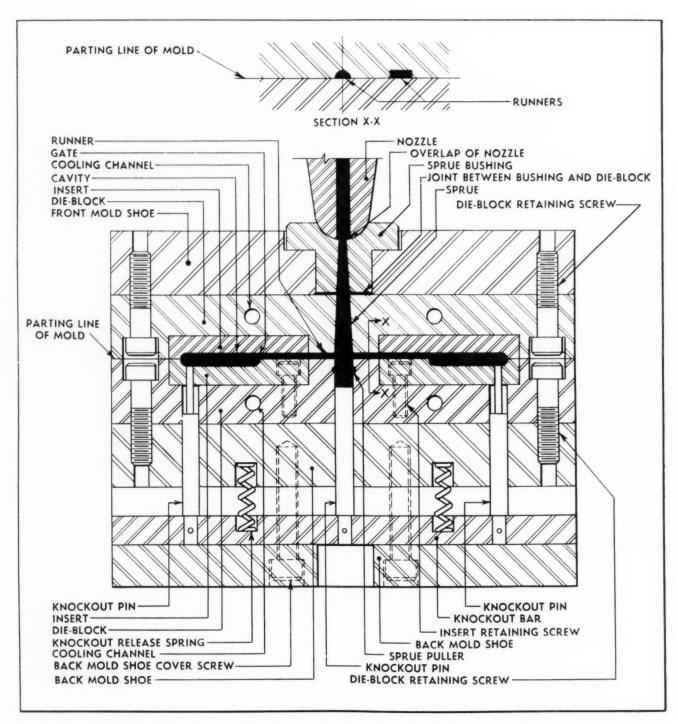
Section of Injection-molding Unit Showing Some Construction Details Not Recommended
